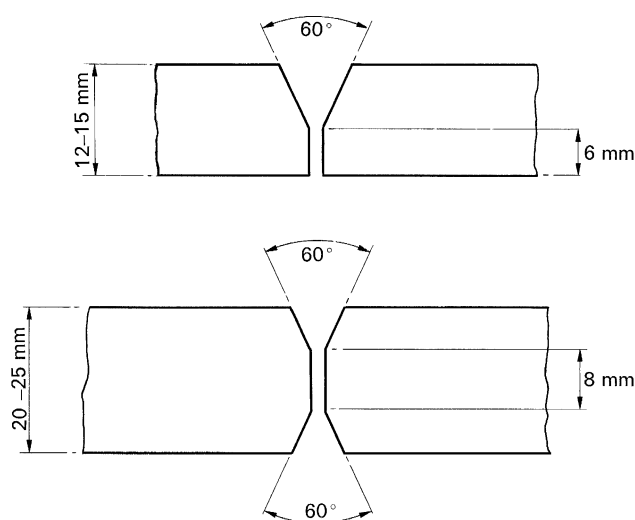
Normal edge preparation for two-run butt weld test assemblies
